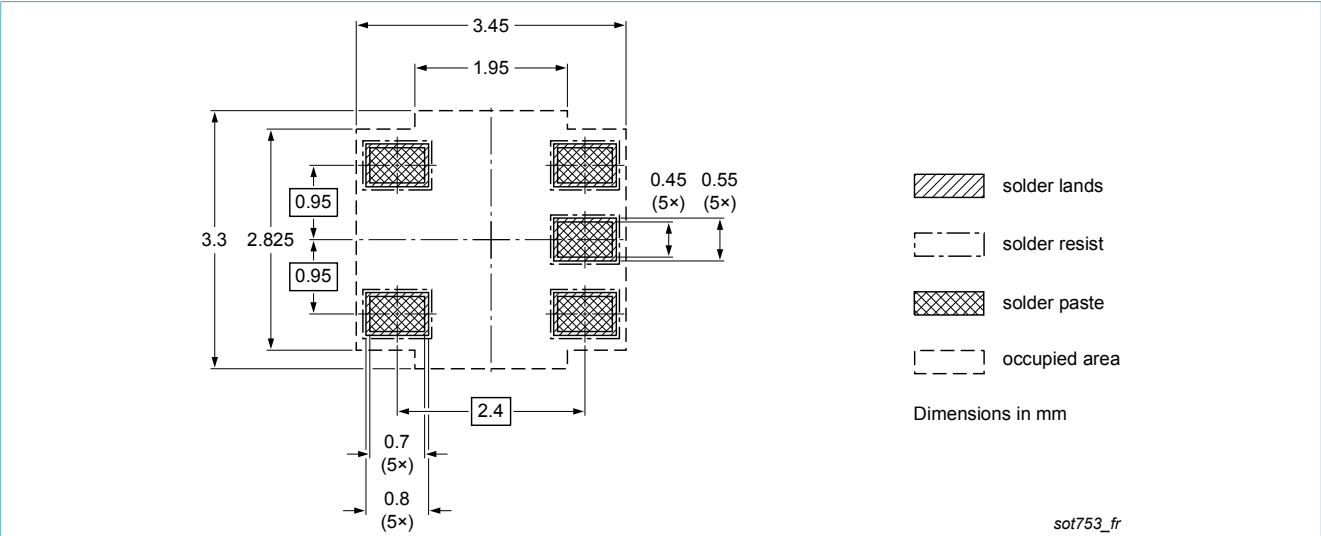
Reflow soldering footprint for TSOP5 (SOT753)
